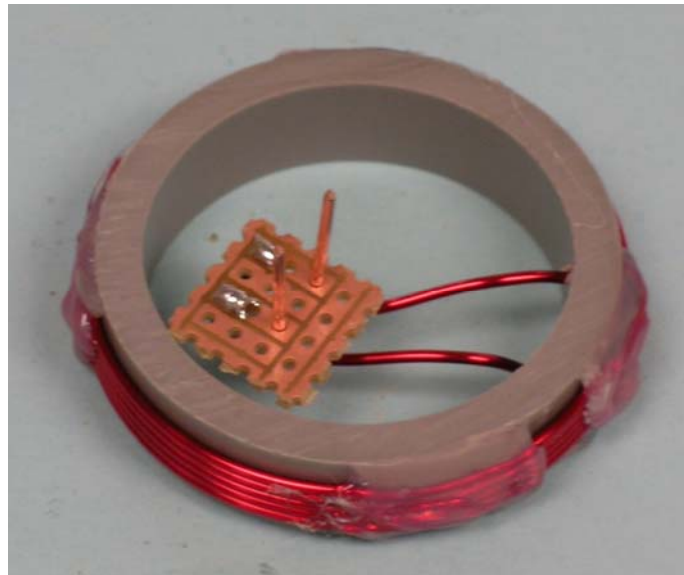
Reference Inductor and PC Component Board Connected Before Soldering
